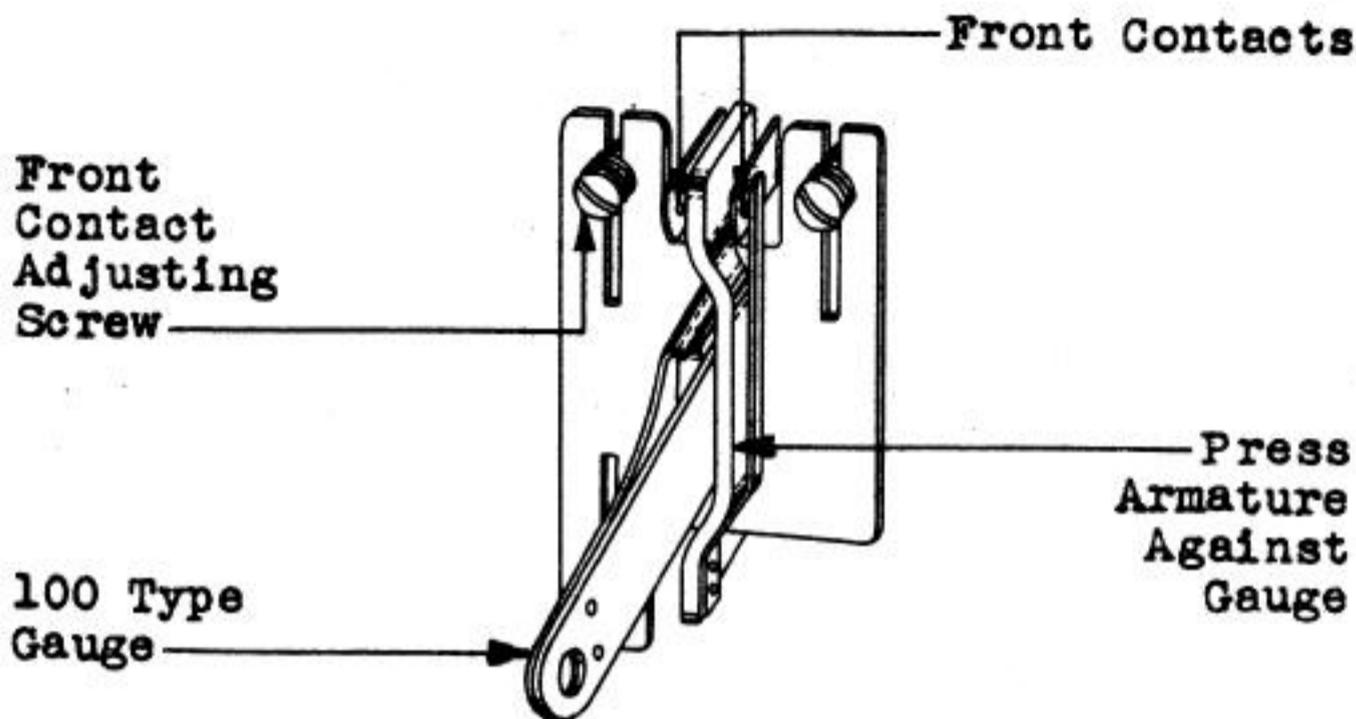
Method of Adjusting for Minimum Front Contact Make
